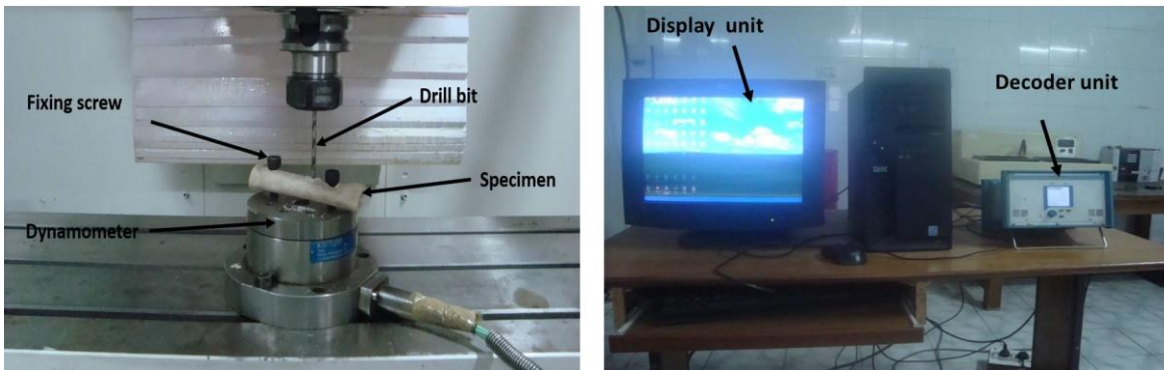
Dynamometer fixed on machine bed, connected to decoder unit and display unit
